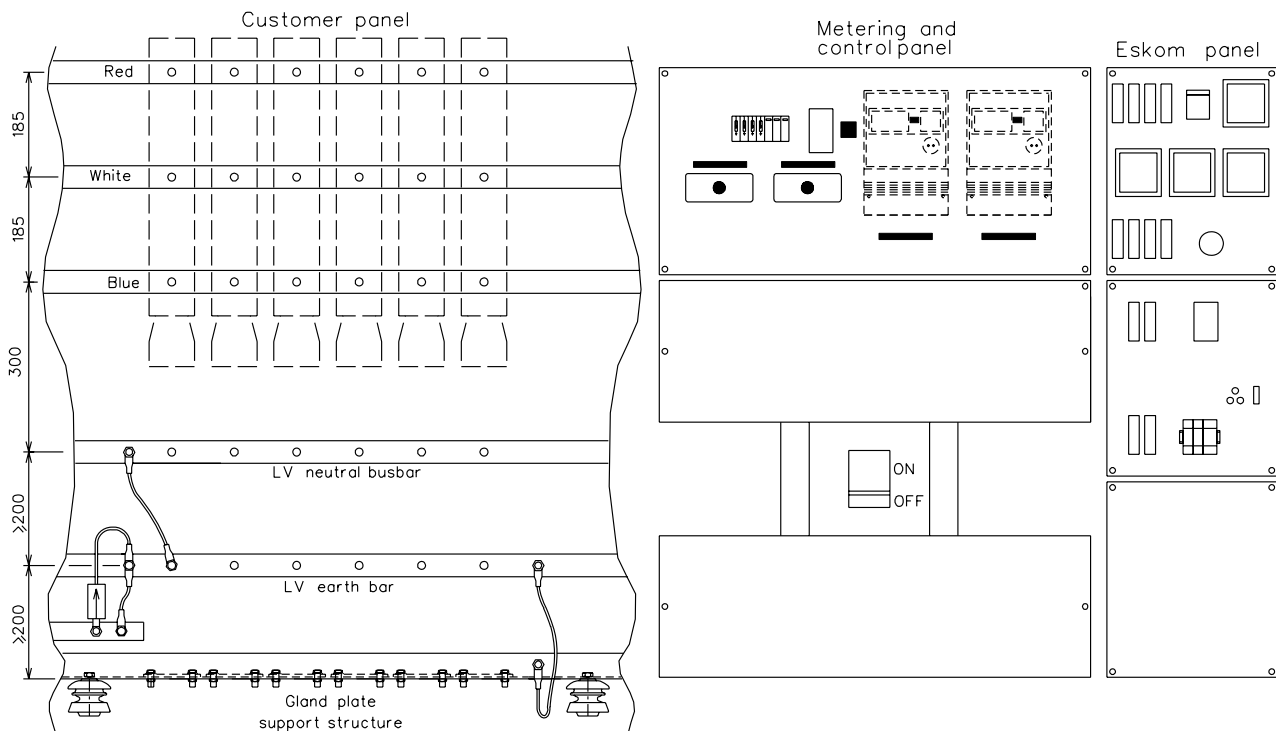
LV ASSEMBLY design – modify metering panel based on D-DT-1013 revision
